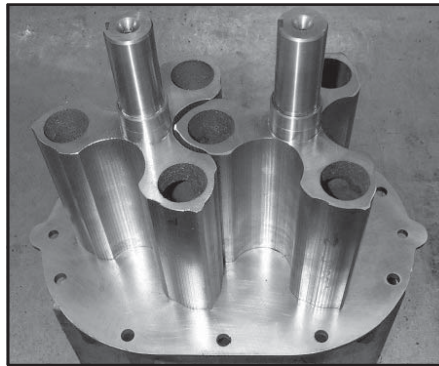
Rotors Assembled on Drive End Plate (Model 4000 with tri-lobe rotors shown)
